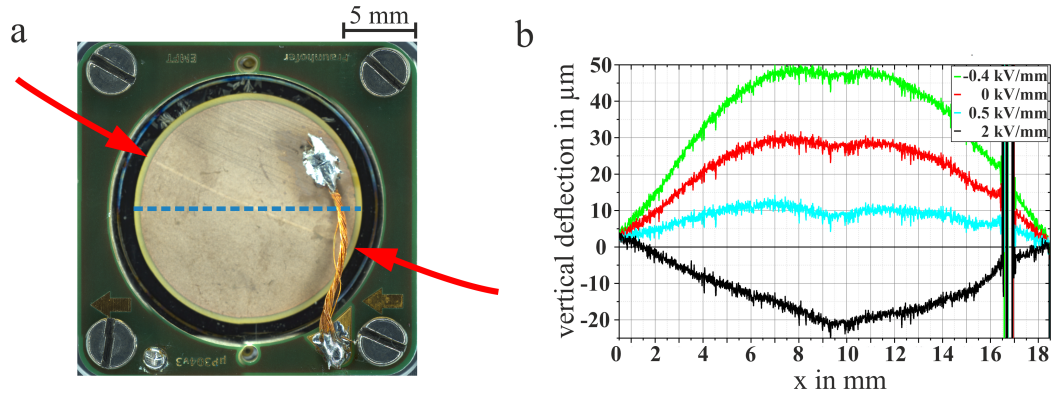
a Light microscope photograph of a microvalve from our previous studies[4]. Red arrows indicate the fracture across the piezoceramic due to excessive bending over the O-ring soft sealing. The blue dashed line indicates the measurement line for topology measurement. b Topology measurement across the piezoceramic with different voltages applied.
